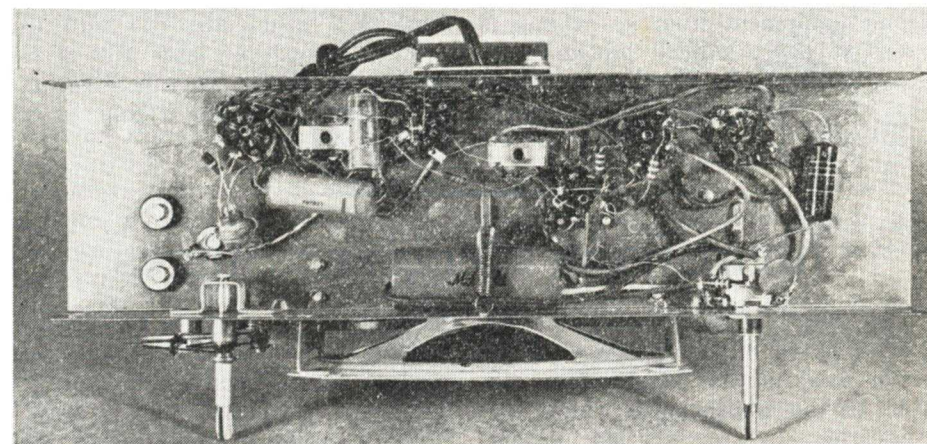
Bottom view of an ac-dc receiver using conventional wiring.
